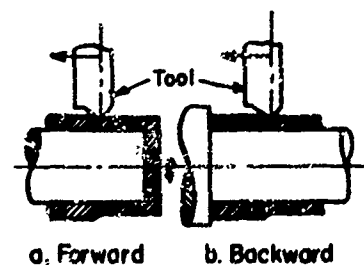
SCHEMATIC OF TUBE SHEAR FORMING<sup>(16)</sup>
